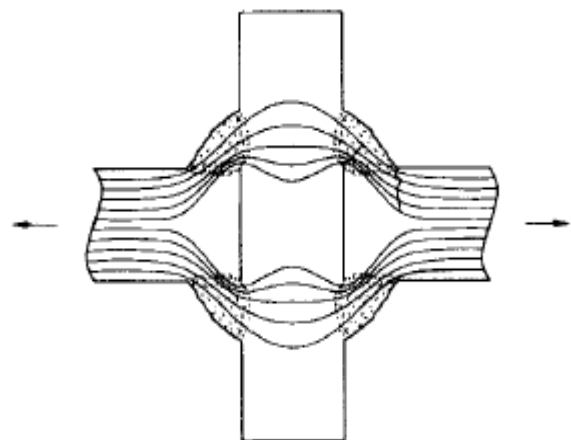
Load carrying fillet weld under tensile loading [16].
